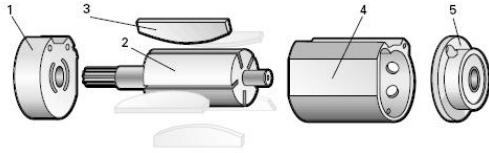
Vane motor components: 1. Front end plate; 2. Rotor; 3. Vane; 4. Stator; 5. Rear end plate (from [9]).
